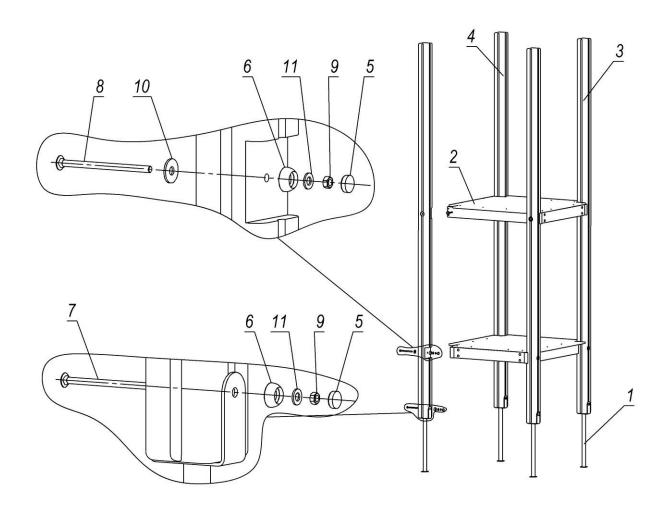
Assemble and install double tower (1,9 x 1 m)
